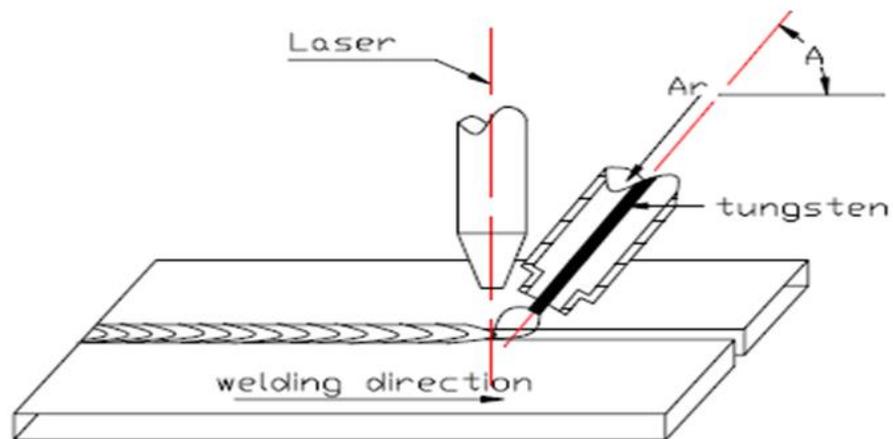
Principle of laser-TIG hybrid welding [122].
